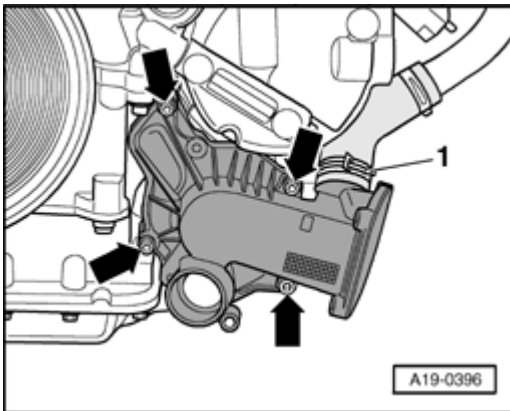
Identifying Coolant Hose & Coolant Pump Housing Bolts
